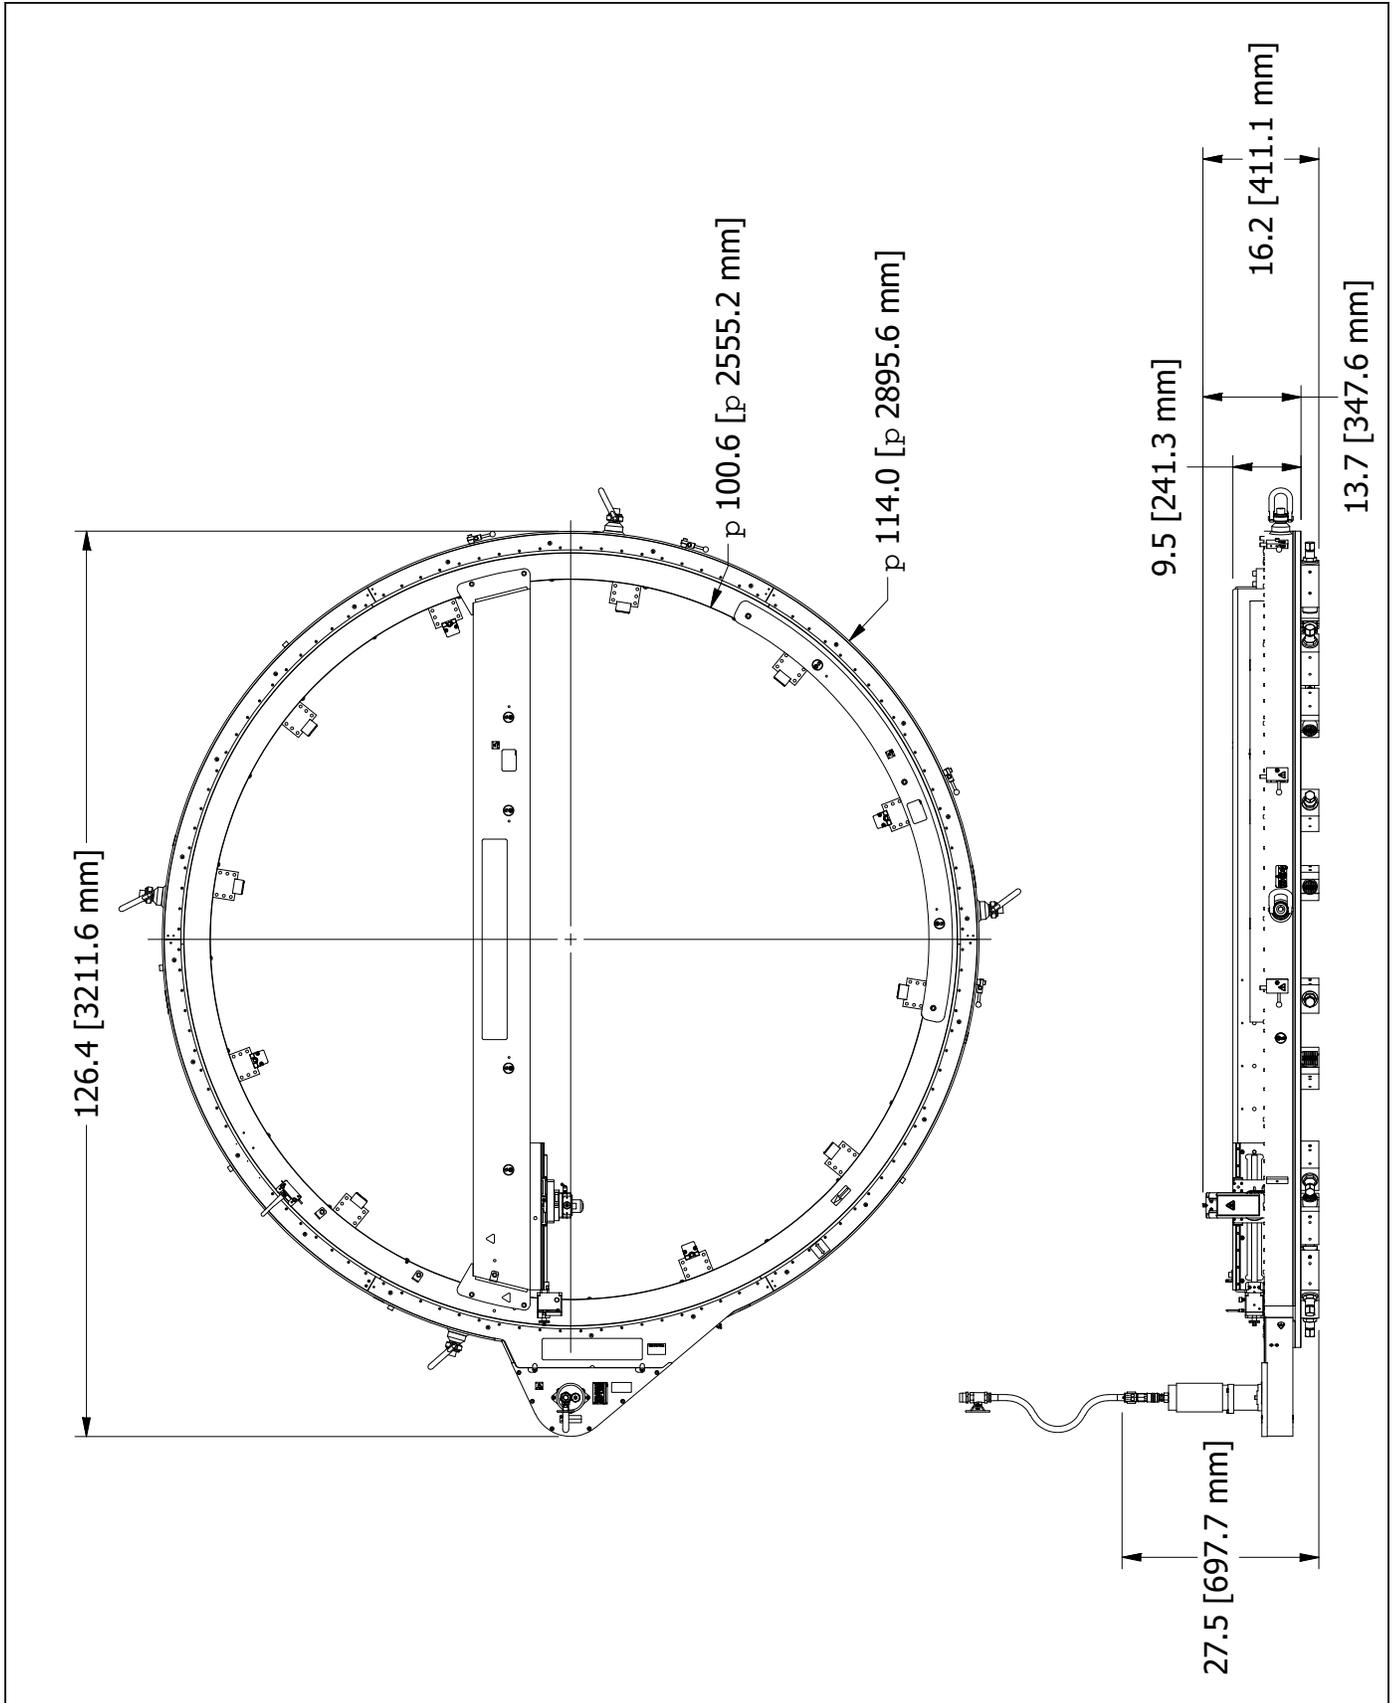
ODF100 SPEED FACER DIMENSIONS (REF. 94790)
